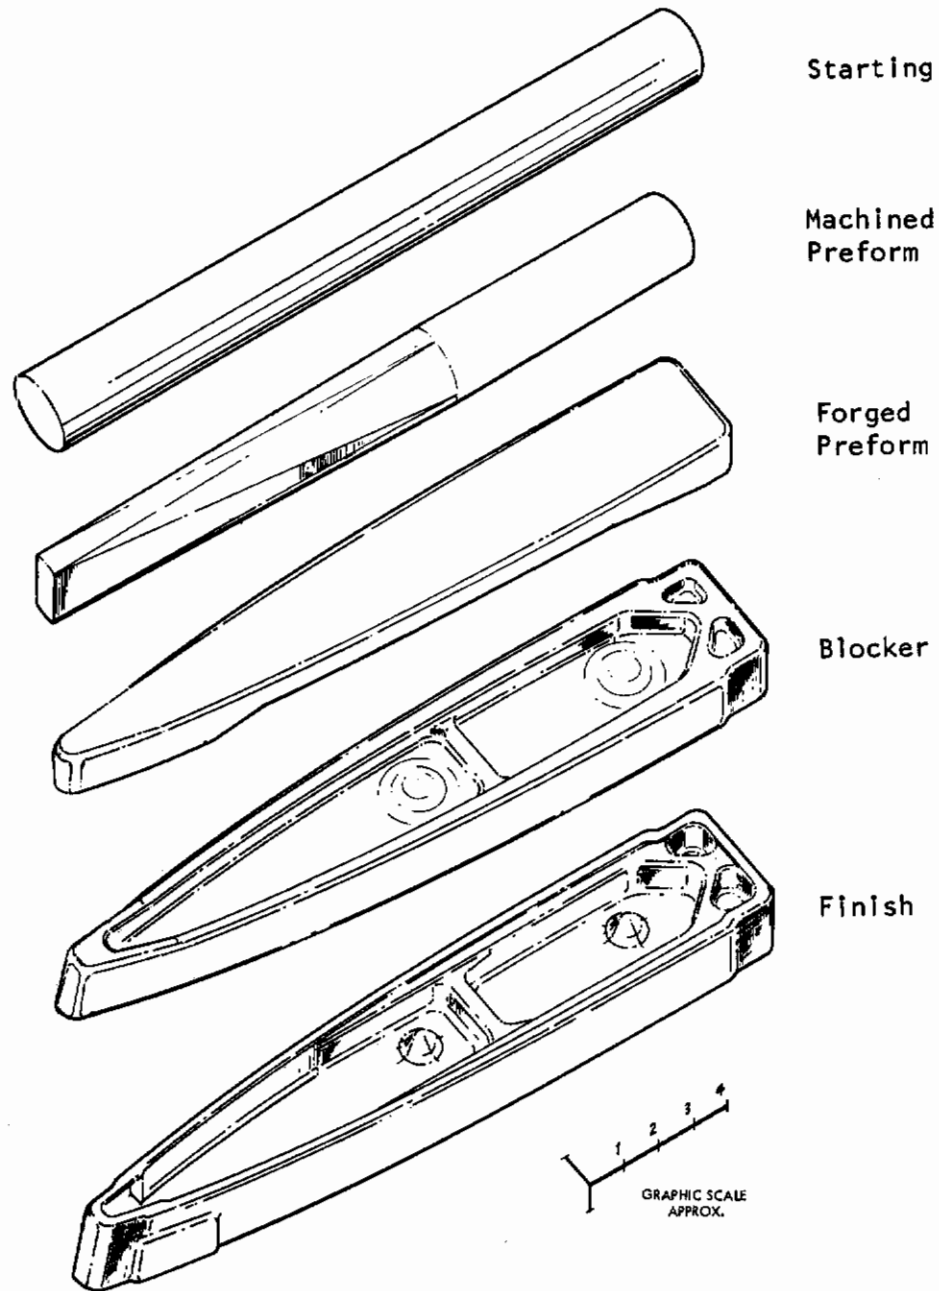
Illustration of Modified Fin Rib Forging Staging Sequence Employed for Final Production of Intermediate Size Forgings with 400,000 Foot-Pound CEFF-Type HERF Machine (Forged Preform Through Finish). Forged Preform Through Finish Shapes are Shown Inverted to Reflect Lower Die Impression Detail.
